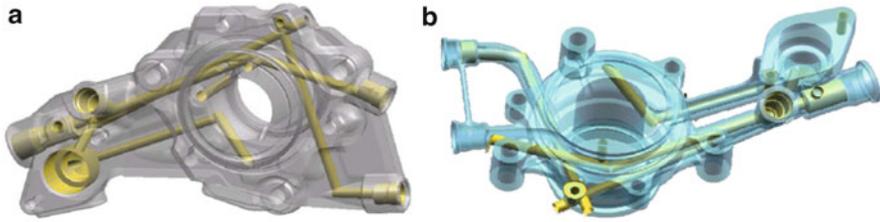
Diesel front plate example. (a) Original design. (b) Redesigned for additive manufacturing
